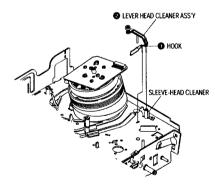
Lever Head Cleaner Ass'y Removal
